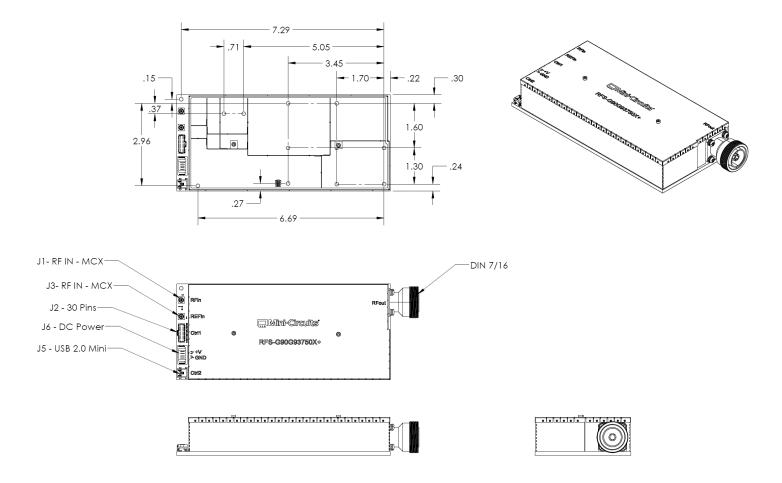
Outline drawing of RFS-G90G93750X+ and assembly holes location.
